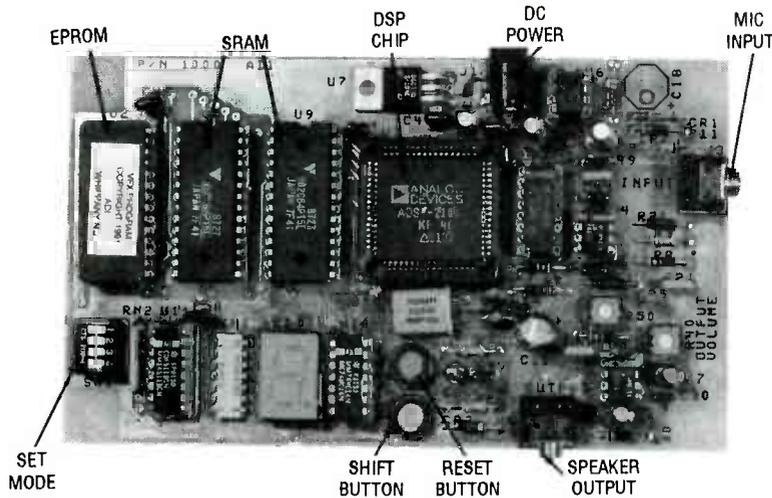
THE VFX PROTOTYPE. Carefully check the board for solder splashes and bridging before applying power.
